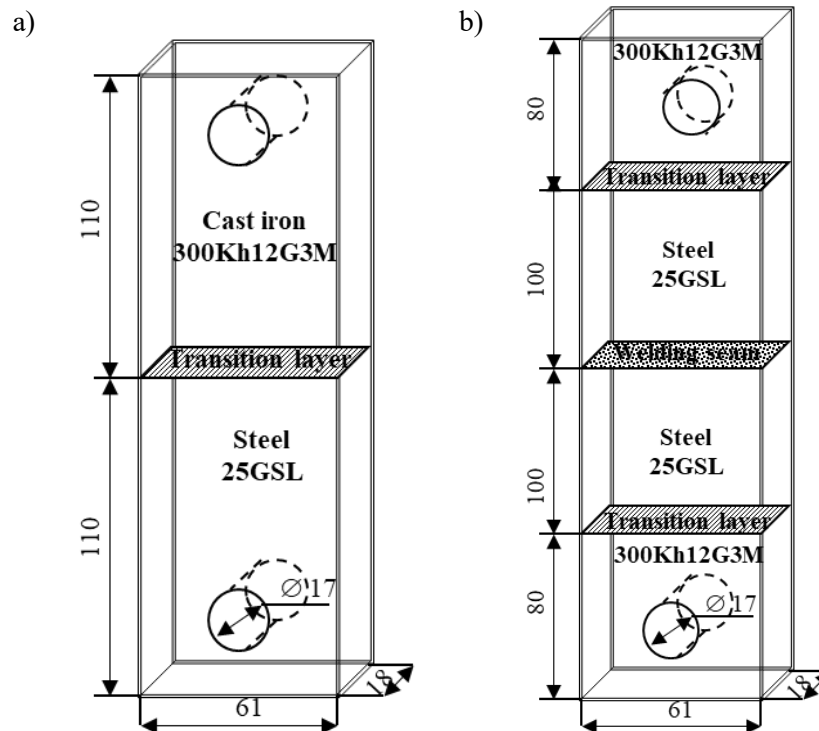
Dimensions and shape of the studied bimetallic castings (a) and cast-welded bimetallic construction (b)
